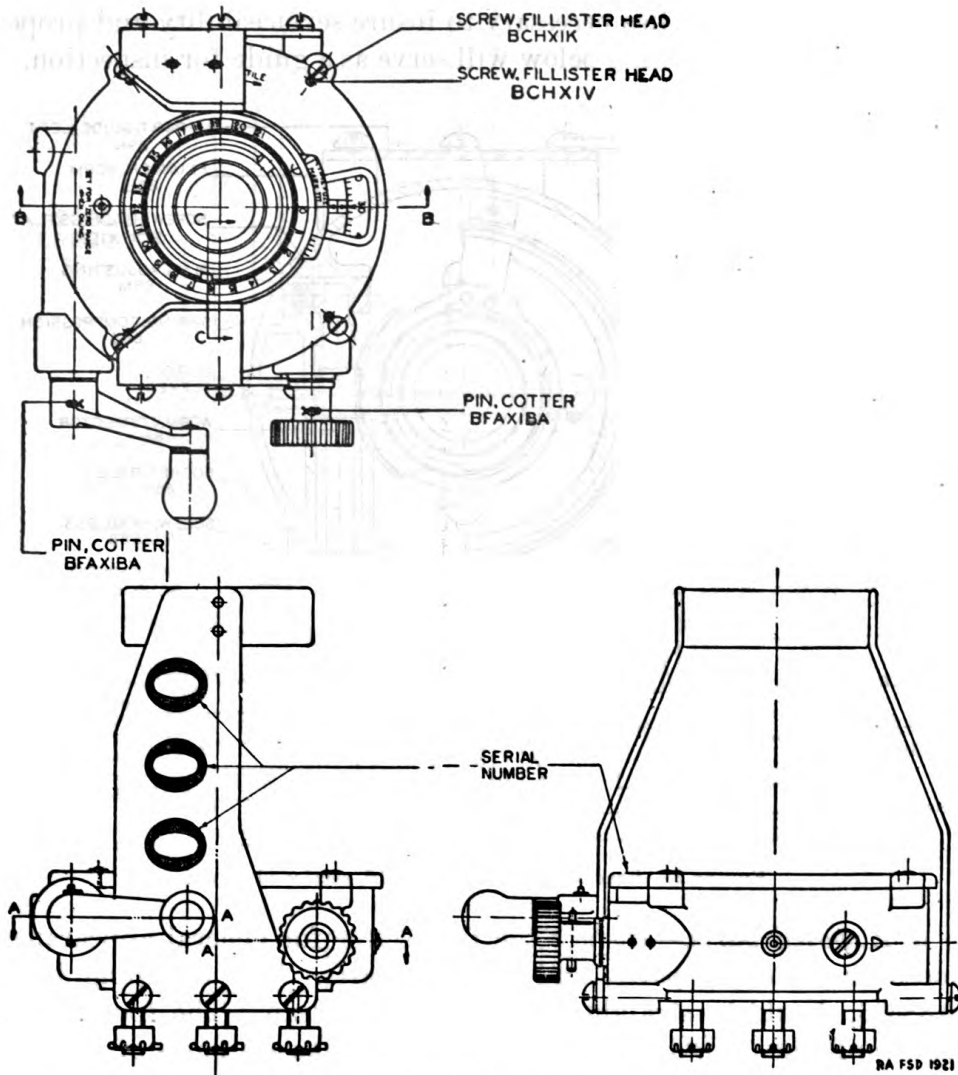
Bracket fuze setter, M1916, assembled views.
